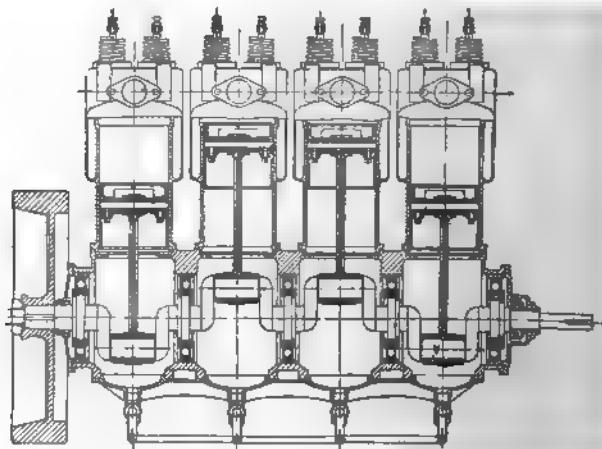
Four-cylinder Gasoline Engine, showing the radial ball bearings on the crank shaft.
